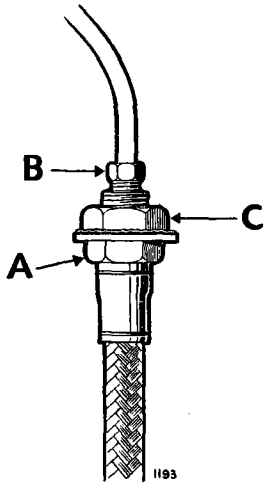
Flexible hose connection. Hold hexagon 'A' with spanner when removing or refitting locknut 'C'.
